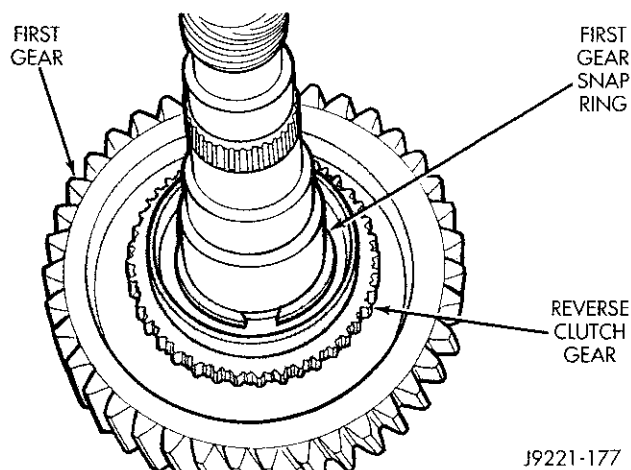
First Gear, Clutch Gear And Snap Ring Installation
